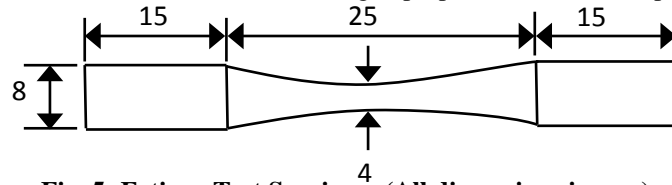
Fatigue Test Specimen (All dimensions in mm)
